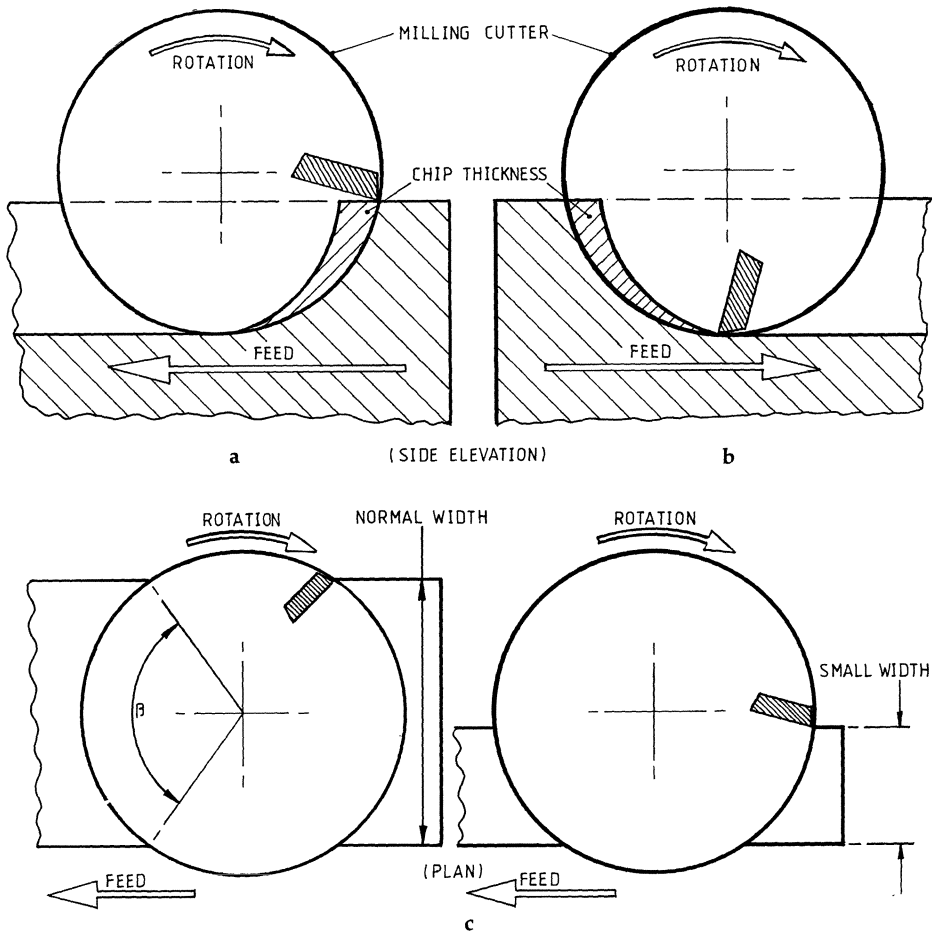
Typical milling techniques adopted for either peripheral (a, b) or face milling (c) operations. a Climb- or down-milling. b Conventional or up-milling. c The effect of workpiece width on the cutter's performance. NB: Use a cutter diameter 30% larger (at least) than the width of engagement.
